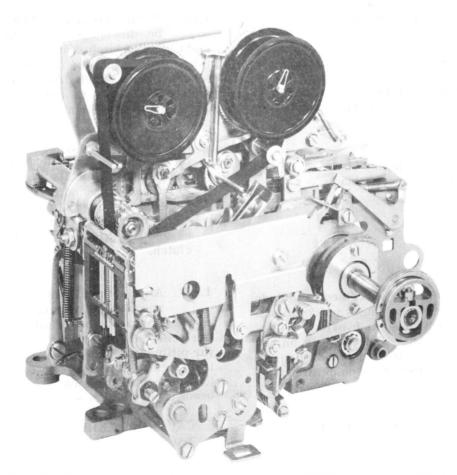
28 Typing Perforator - Chadless Tape (With Backspace Mechanism)
